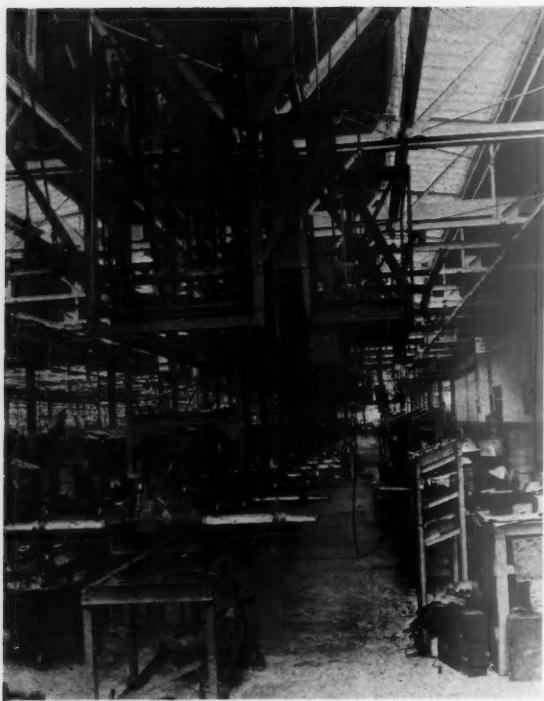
Loading end of the flight conveyor for back axle assembly.
